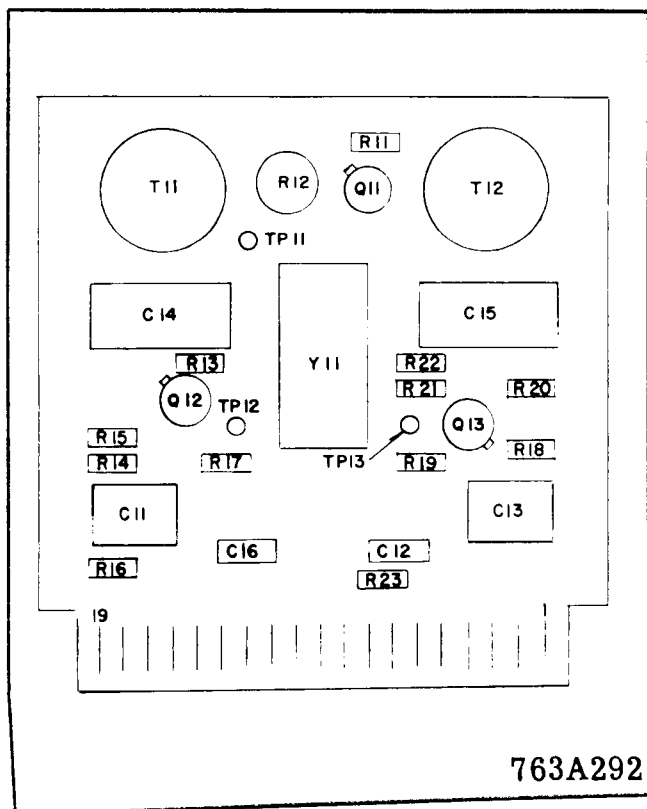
Component locations on the oscillator and mixer printed circuit board.
